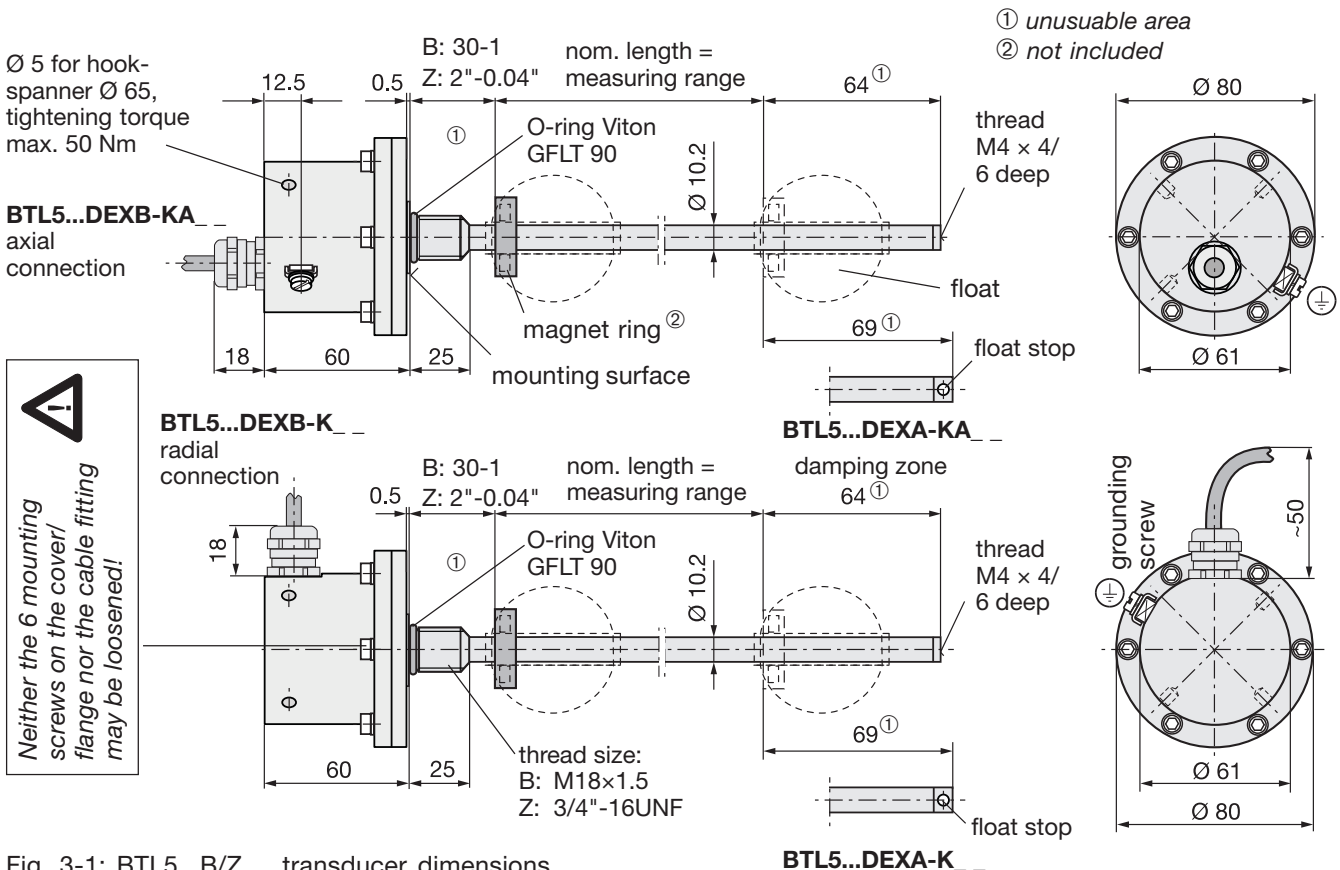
BTL5...B/Z..., transducer dimensions
